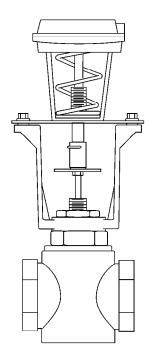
Typical MK-47X1 Series Actuator Using the AV-430 Valve Linkage.
